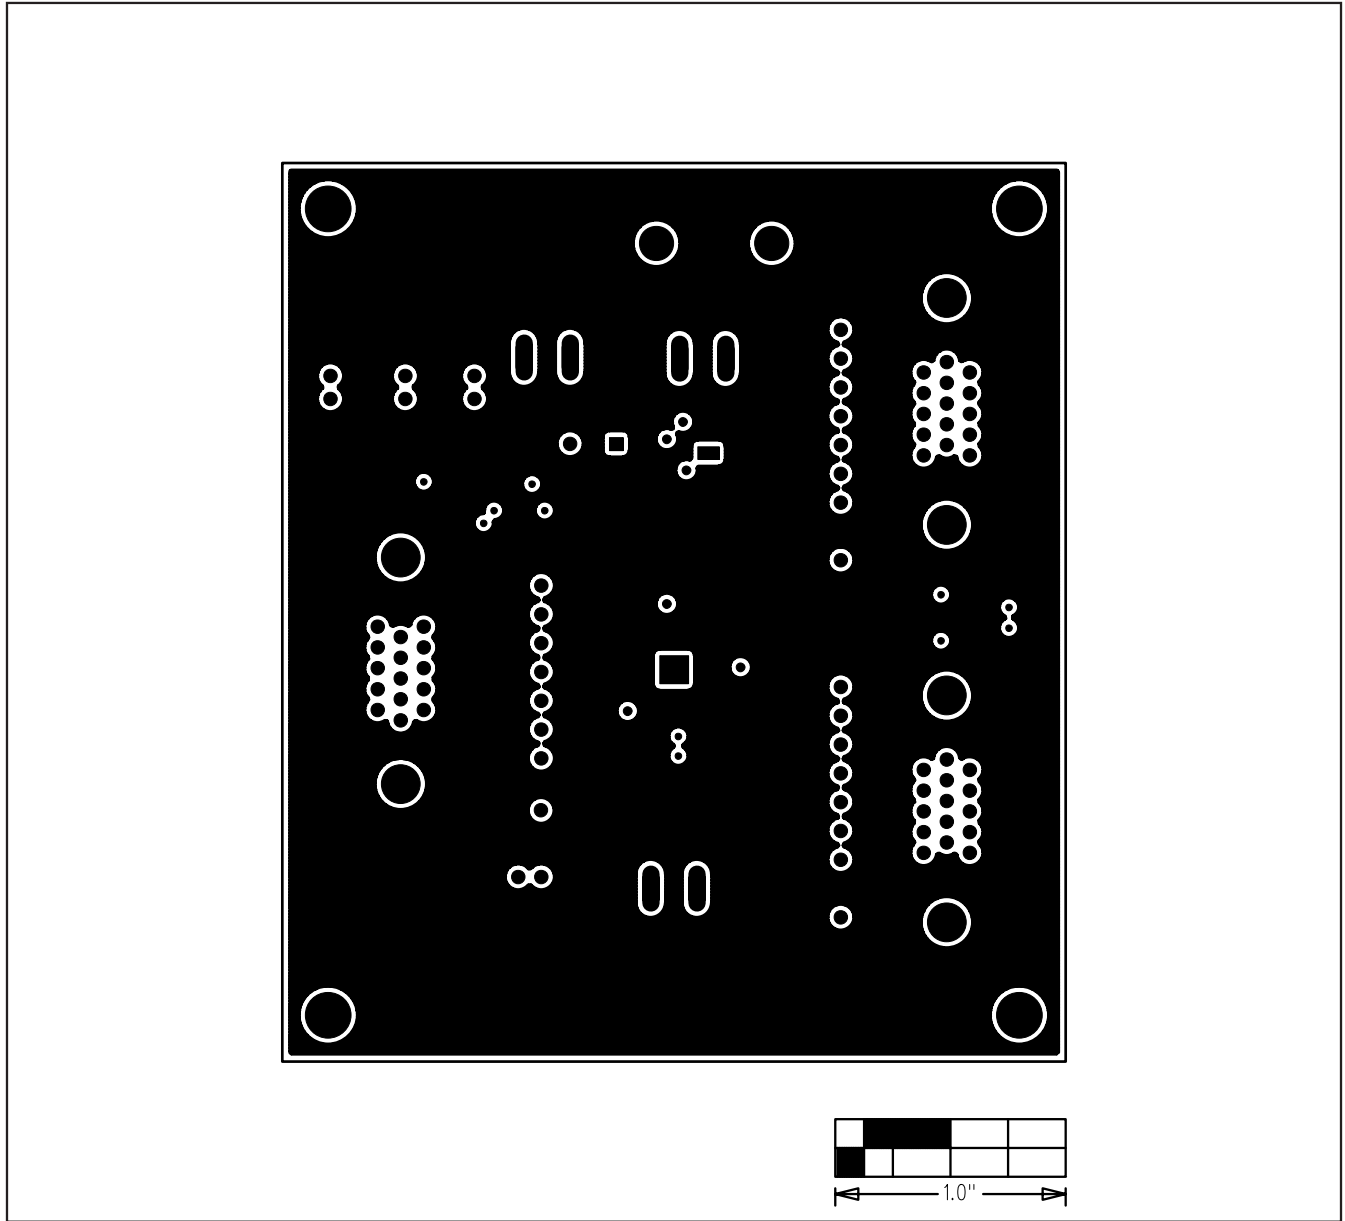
MAX4885 EV Kit PCB Layout—VCC Layer 3
